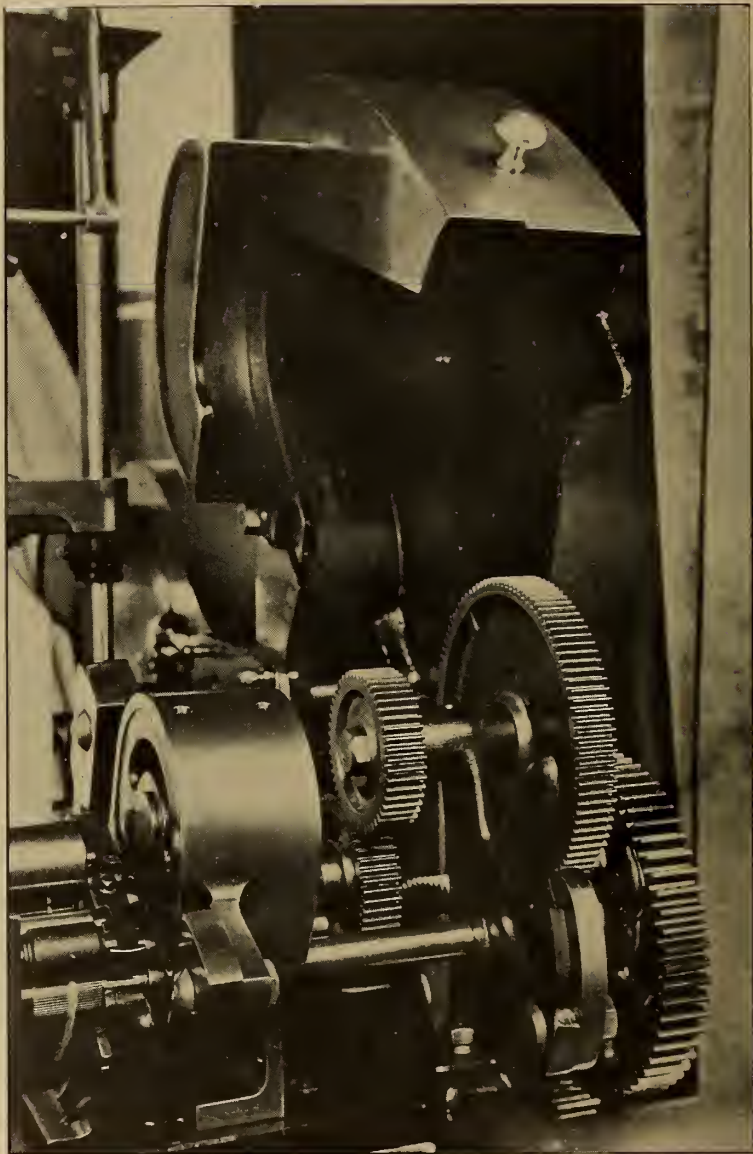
GEAR WHEELS AT END OF RING FRAME
